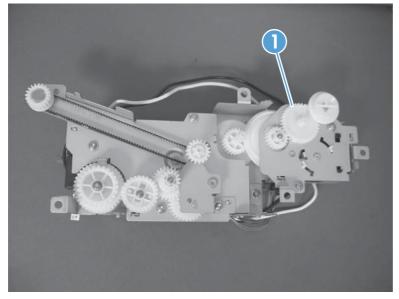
Remove the fuser drive assembly (6 of 6)
